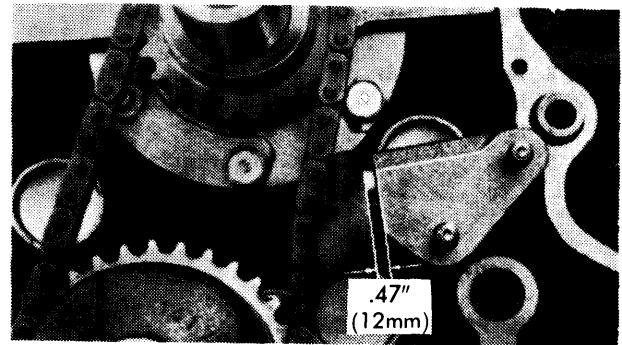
Measuring Oil Pump Drive Chain Tensioner Extension
